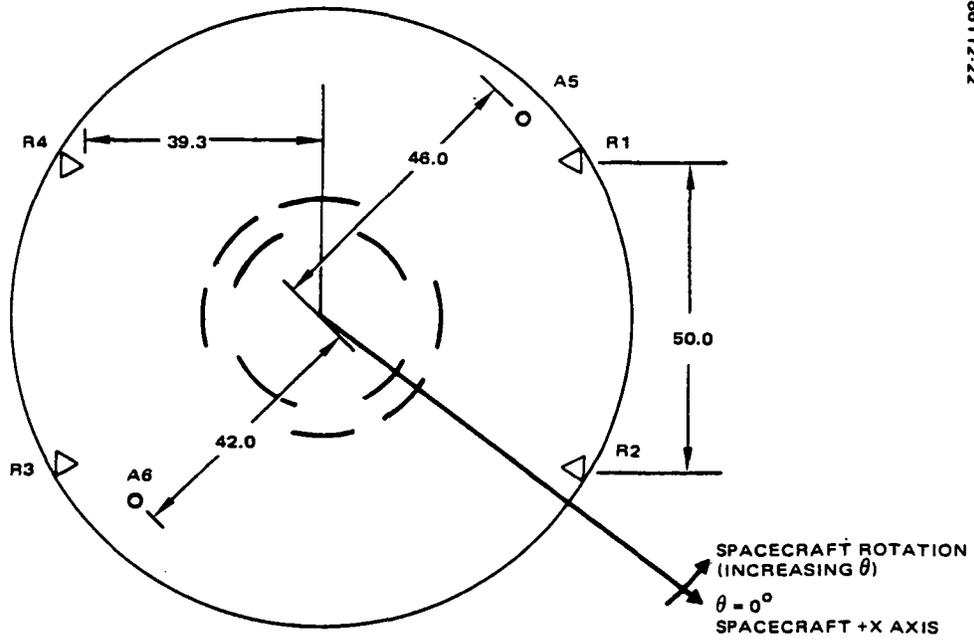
MULTIPROBE THRUSTER LAYOUT
